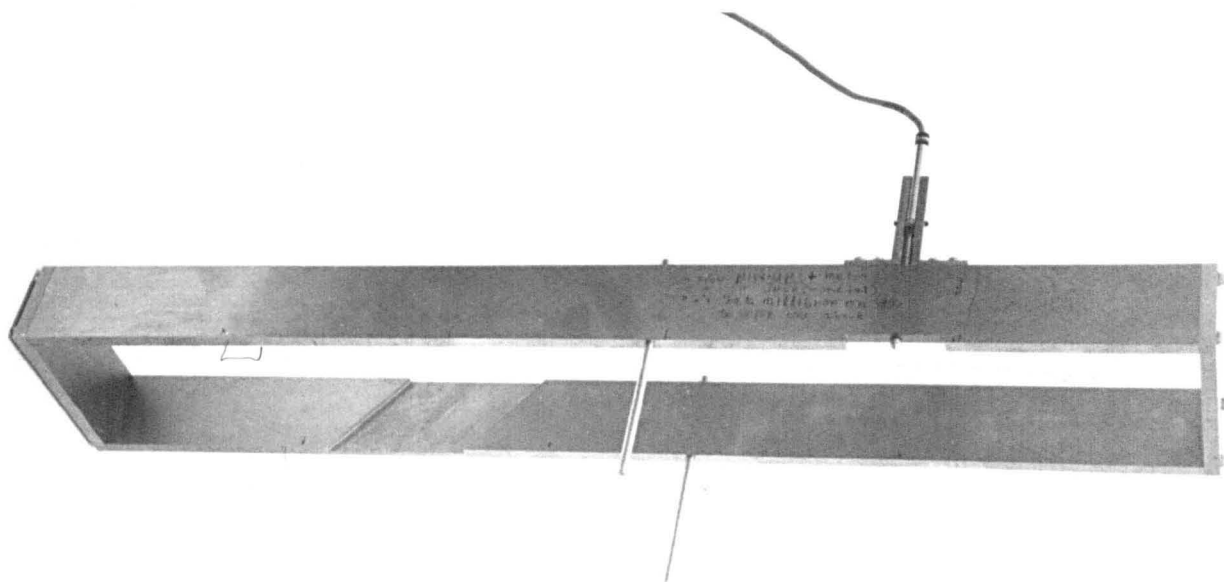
Shaft Horizontal Misalignment Measurement Jig
